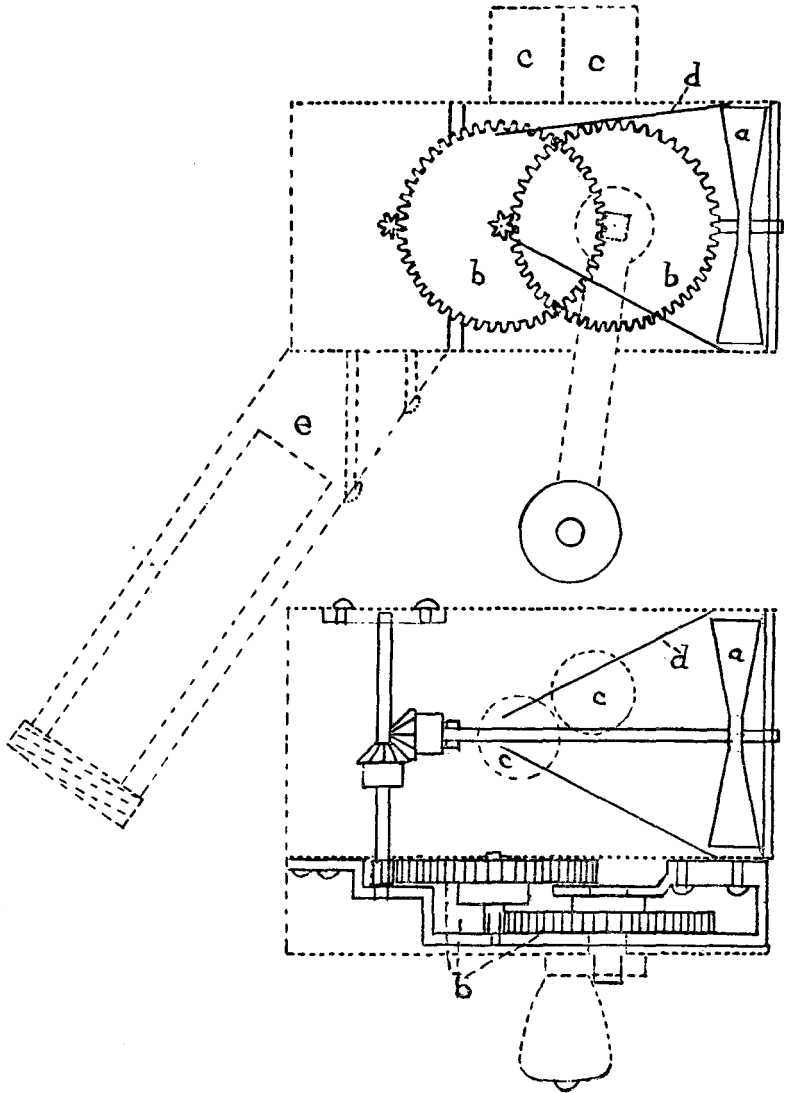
Psychrometer, x 1. Side and top view; a fan, b driving gears, c thermometer openings, d air current funnel, e handle.
